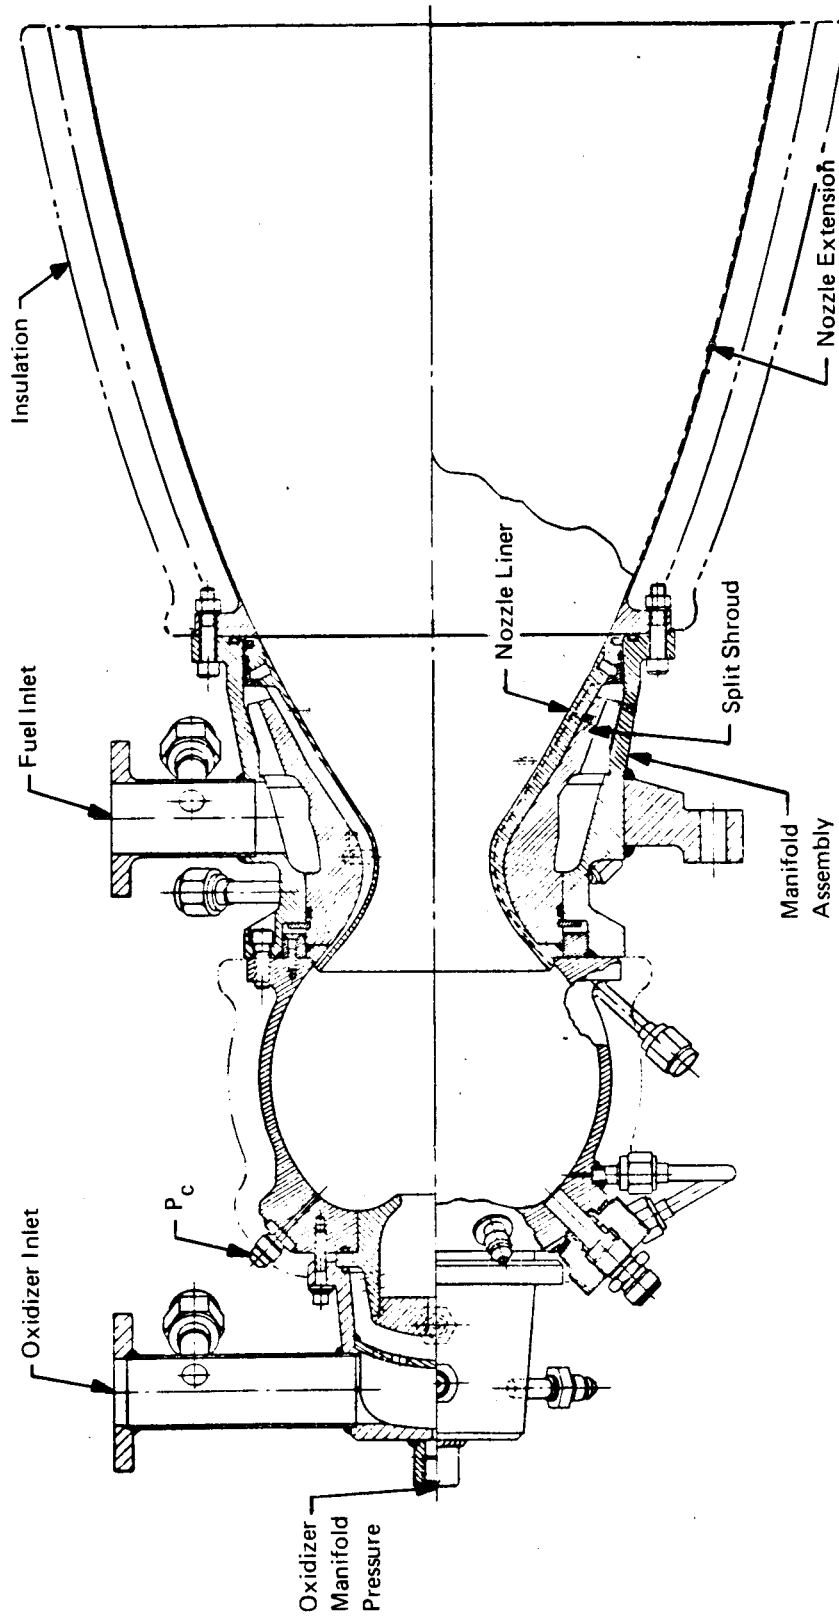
1500 lb (6672N) Thrust Altitude Test Assembly – Cb Extension
